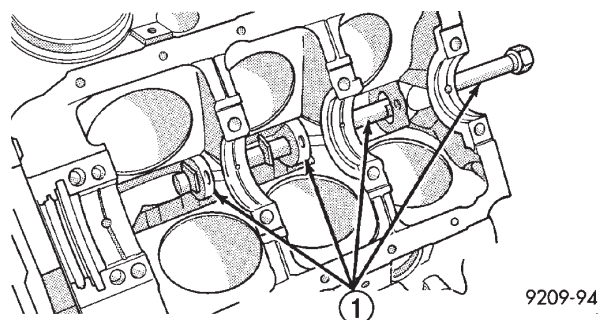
Camshaft Bearings Removal and Installation with Tool C-3132-A
